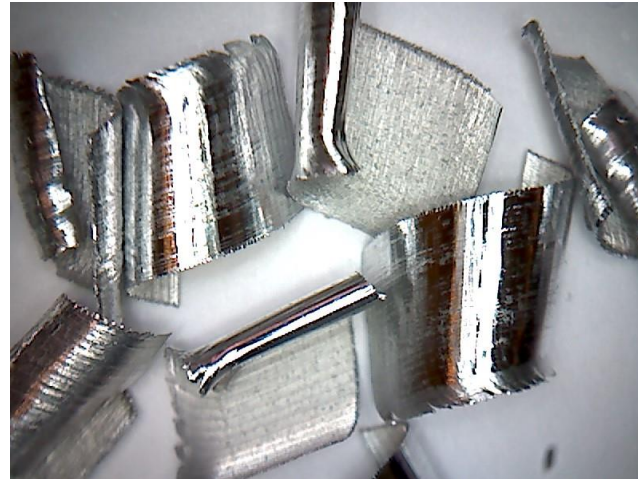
Aluminium chips – 5mm Milling at 3000RPM using LN2 as coolant.
